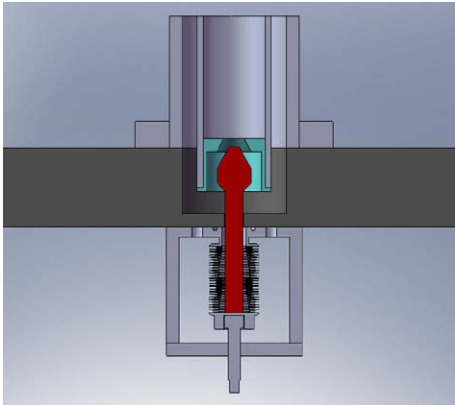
Concept of a throttle valve to adjust the pressure drop in the dummy target.
